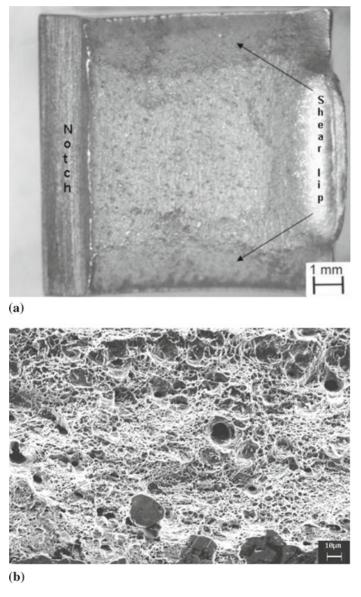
Stereo fractograph showing (a) the fracture surface of the Izod impact specimen tested at RT. The fracture surface at the centre is fibrous with slight directionality. Extensive shear lip formation is also observed. (b) SEM fractograph showing dimpled rupture in the initiation zone below the notch of the impact specimen tested at RT. Two sizes of dimples are evident.
